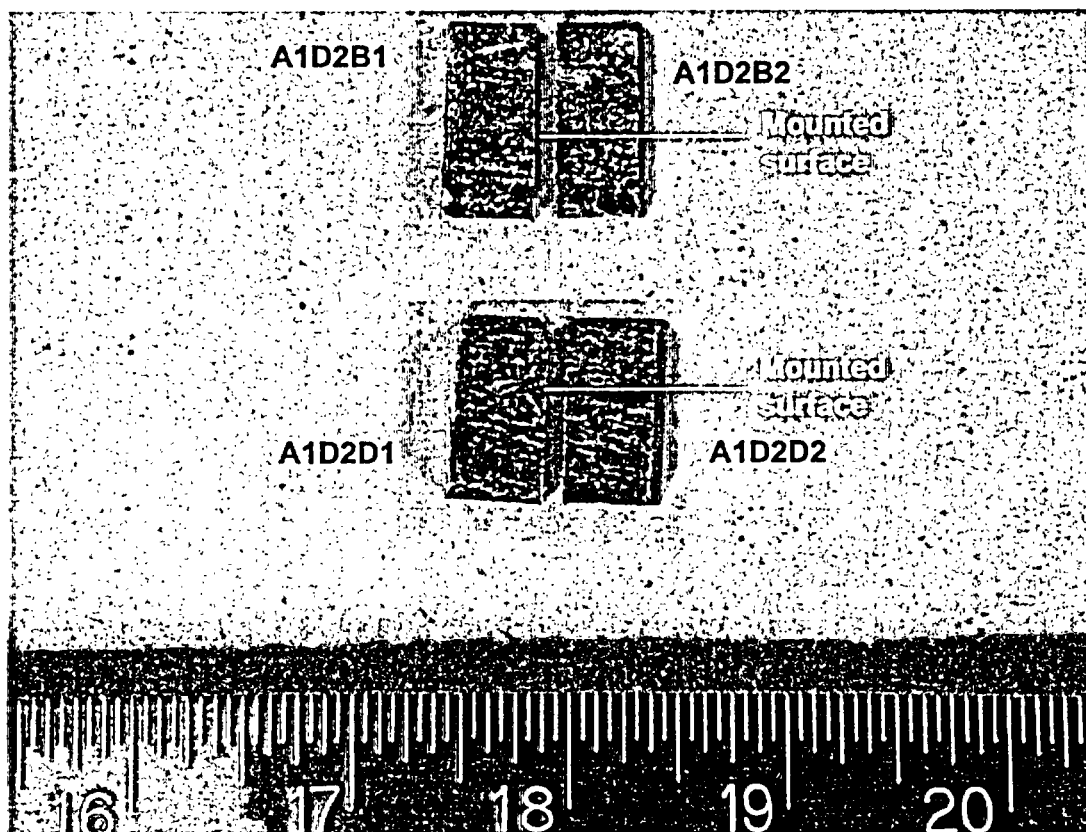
Section photo for Pieces A1D2B and A1D2D, looking at the cavity side wall. The mounted faces for Piece A1D2B1 and Piece A1D2D1 are indicated.
